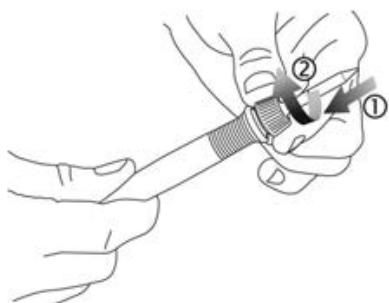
Fit the soldering tip [1], overcome the spring force and lock the bayonet mount [2]
